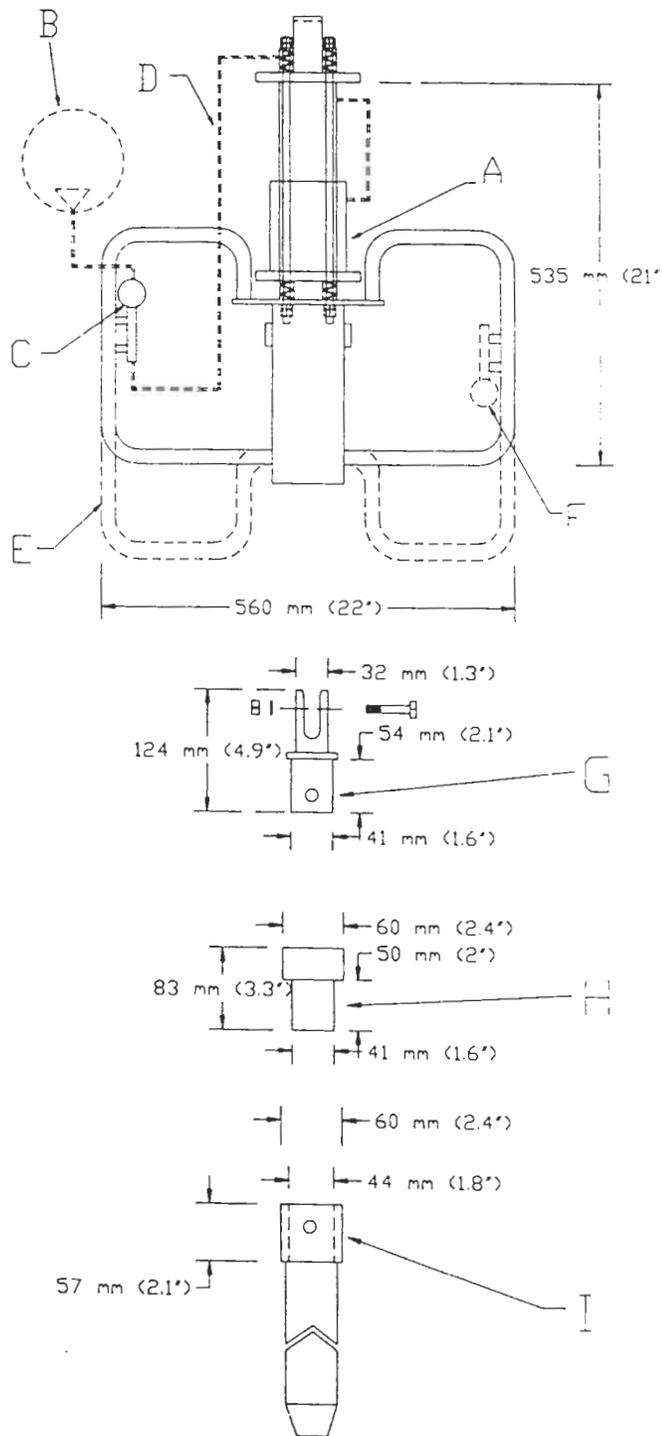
Schematic of the pneumatic core driver, driving head, and pulling adaptor: A. core driver, B. main air supply, C. relocated valve trigger mechanism, D. air supply line, E. original location of handles, F. original location of valve trigger mechanism, G. core tube pulling adaptor, H. driving head, and I. core tube with reinforced steel collar.
